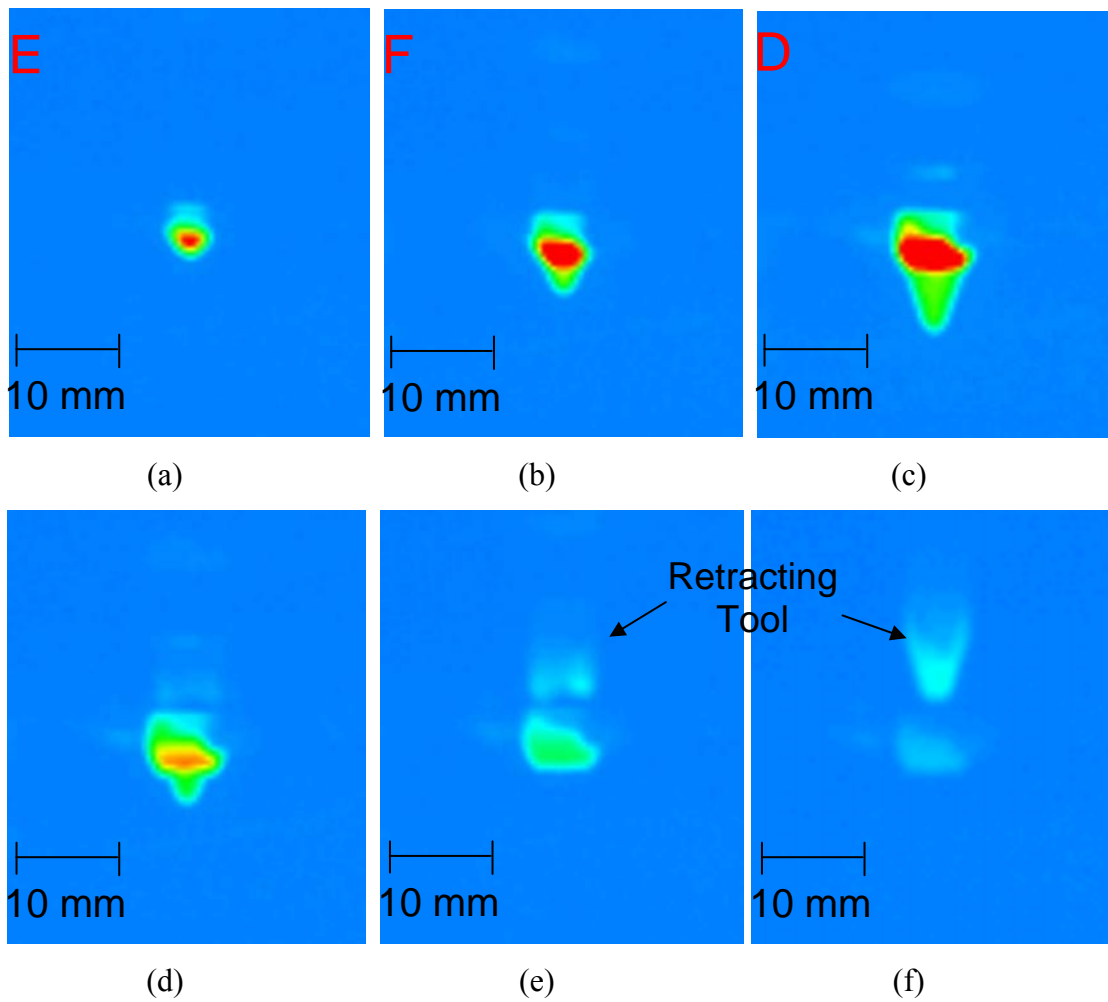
Infrared camera pictures of friction drilling: (a) 2 s, (b) 3 s, (c) 5 s, (d) 8.5 s, (e) 10 s, and (f) 12 s from the contact of the tool and workpiece.
